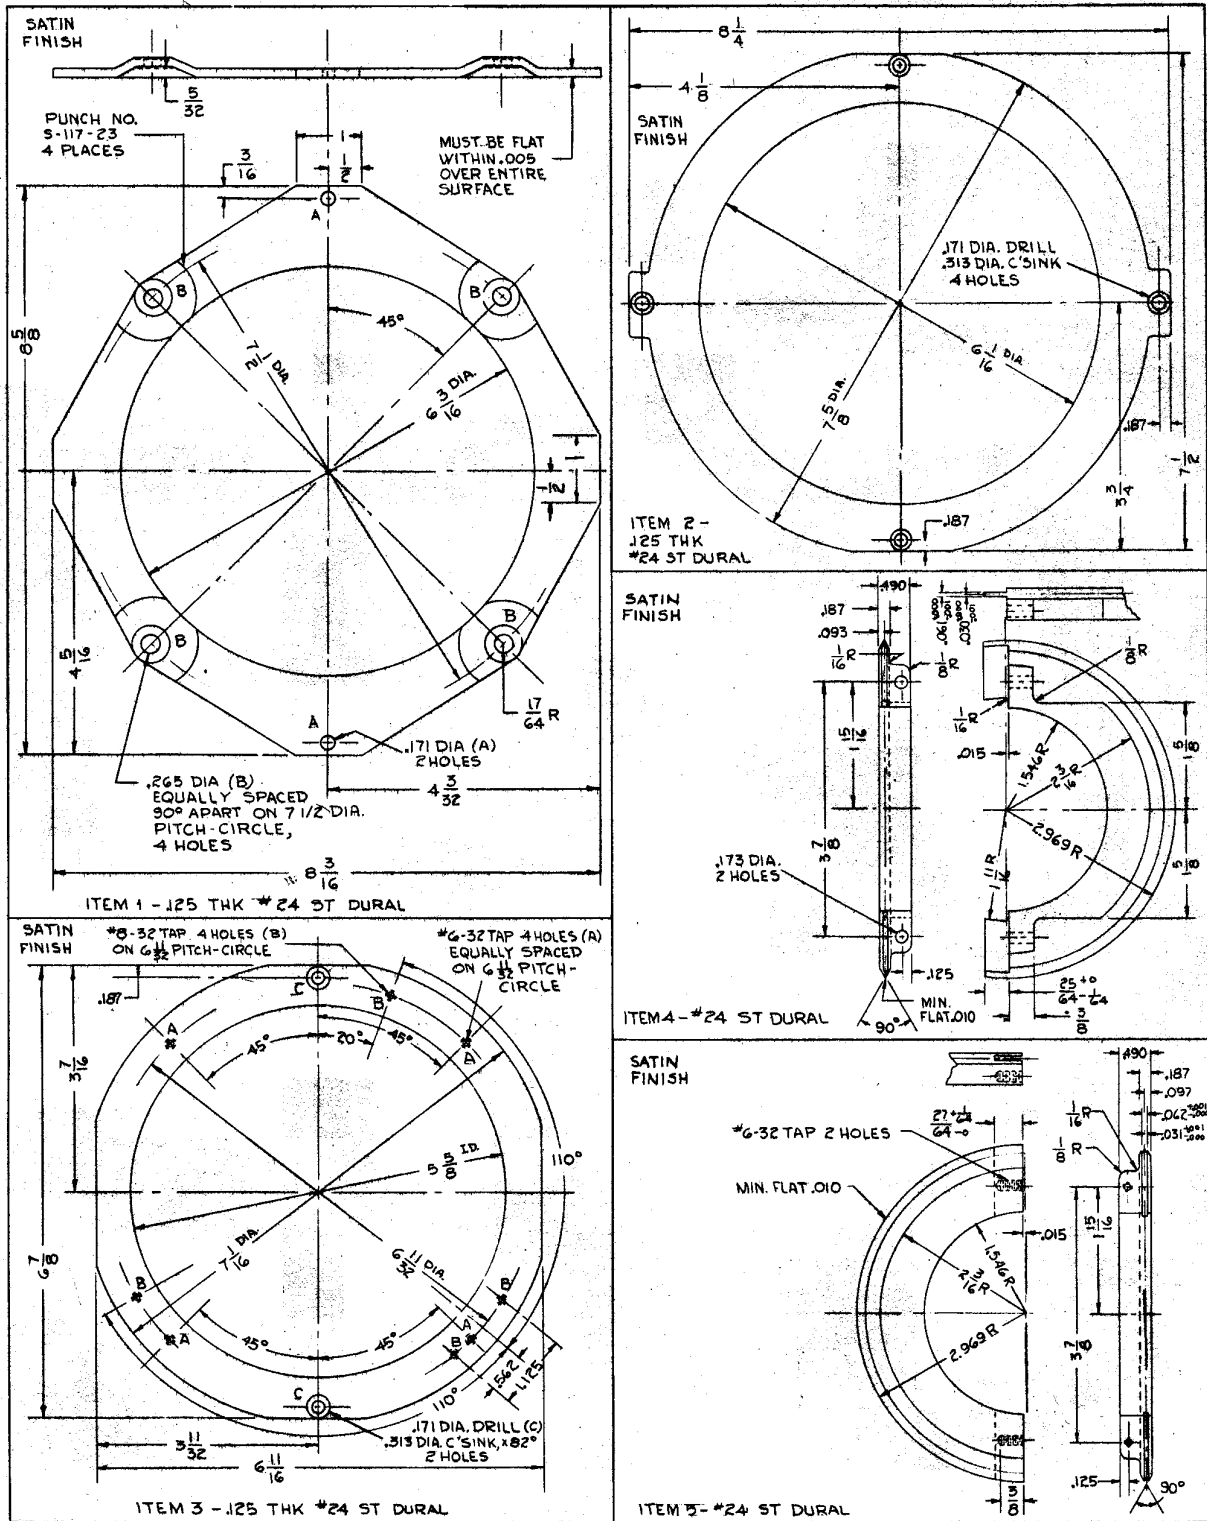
Items 1 through 5 of Yoke Mounting Assembly
